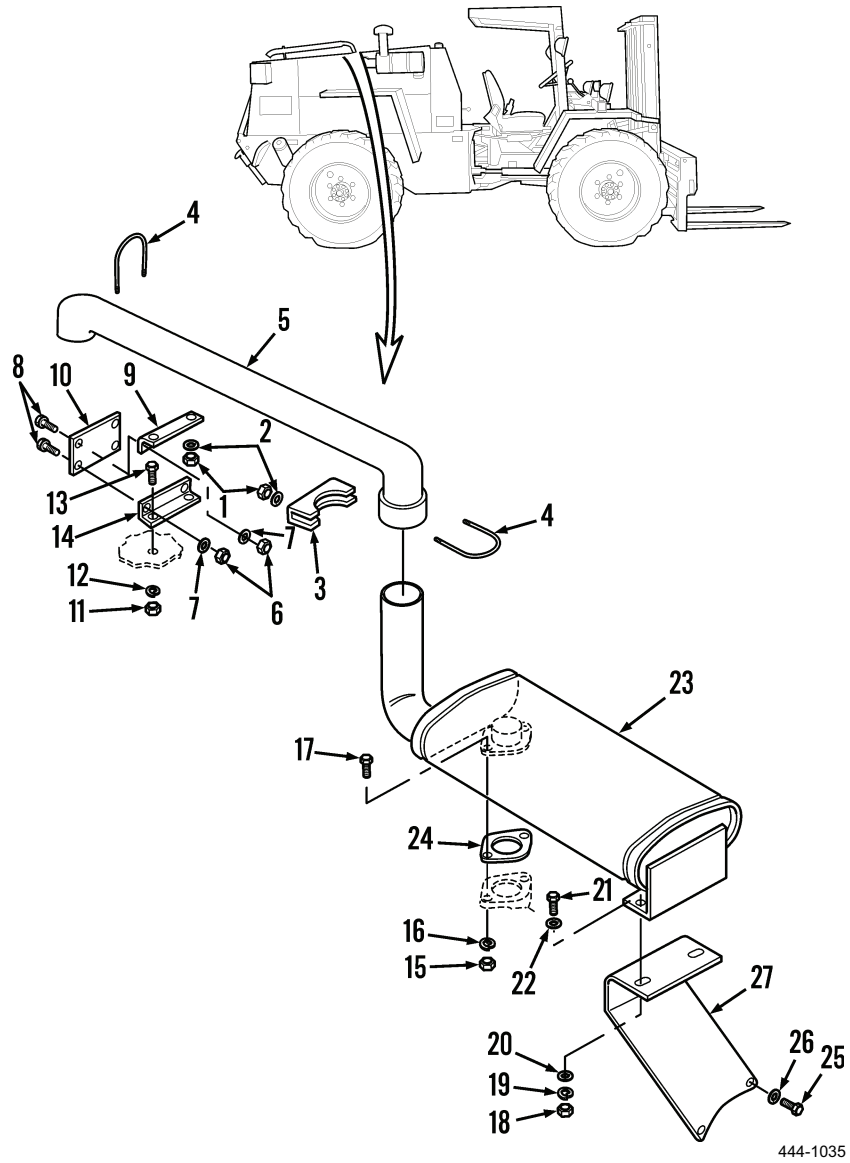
Spark Arresting Muffler and Exhaust Pipe Assembly.
